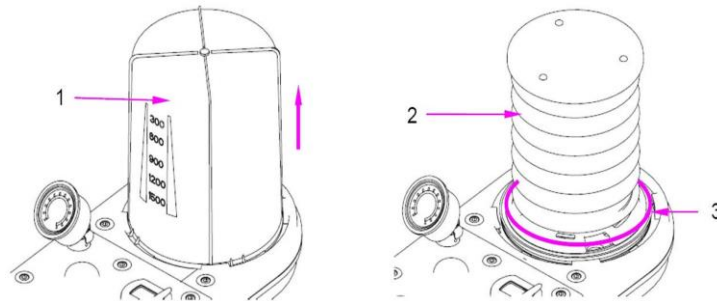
Assemble and Disassemble – Housing and Bellows
